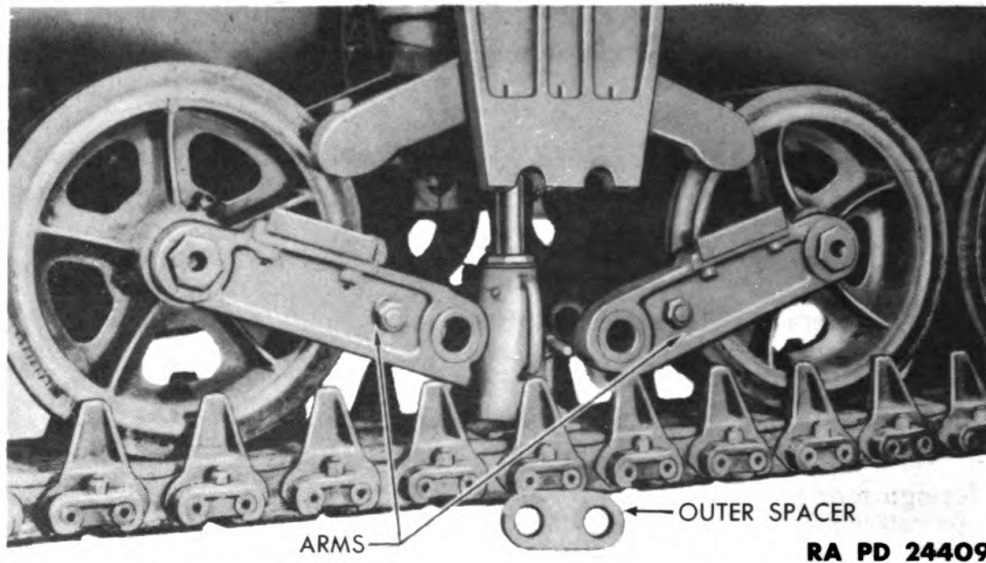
Wheels and Arms Ready for Removal Preparatory to Removing Volute Springs
